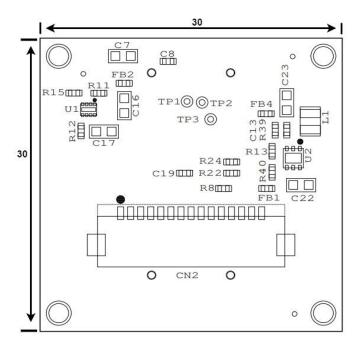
Rear Portion of e-CAM22_CUNX Adaptor Board Mechanical Dimensions
